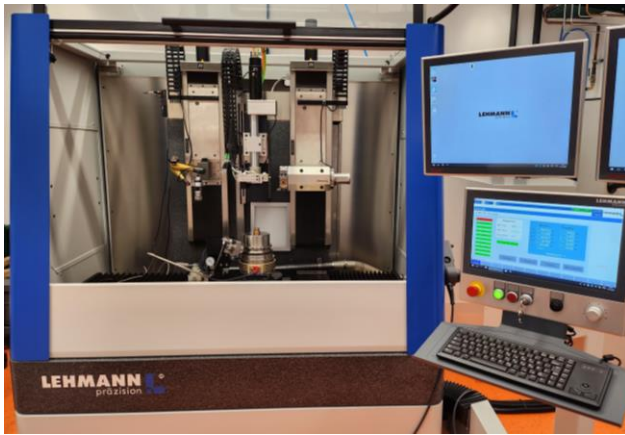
Modular alignment turning machine, developed at Fraunhofer IOF and realized in collaboration with Lehmann Präzision GmbH
